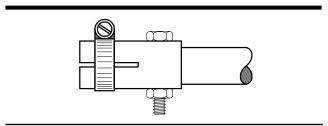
The joint between two sections of ⁵/₈-inch tubing is made from a ¹/₂-inch copper pipe coupling, bolted to one section and hose clamped to the other.
